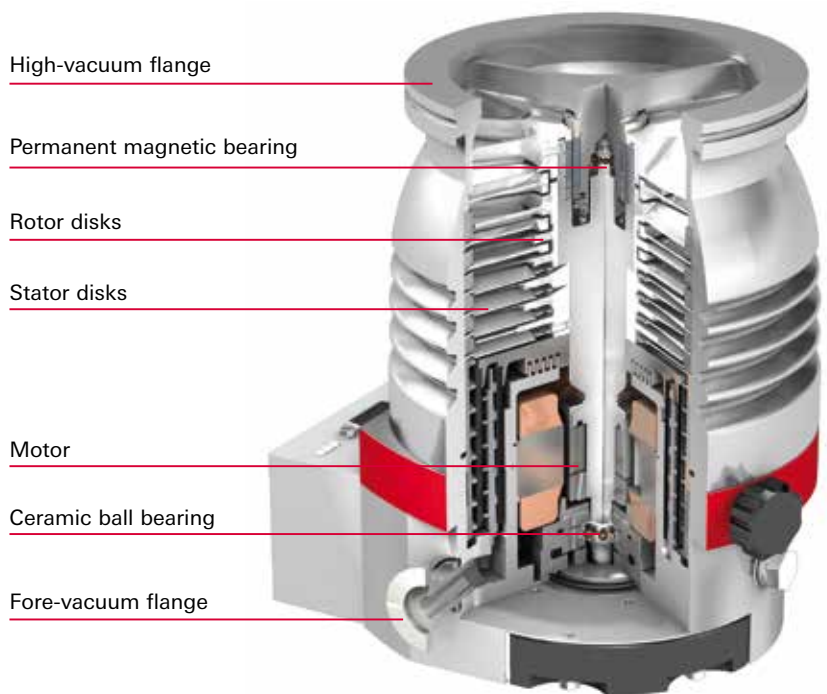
Sectional model of a hybrid-bearing turbopump showing the rotor shaft bearing arrangement with a permanent magnet bearing and a ball bearing.
